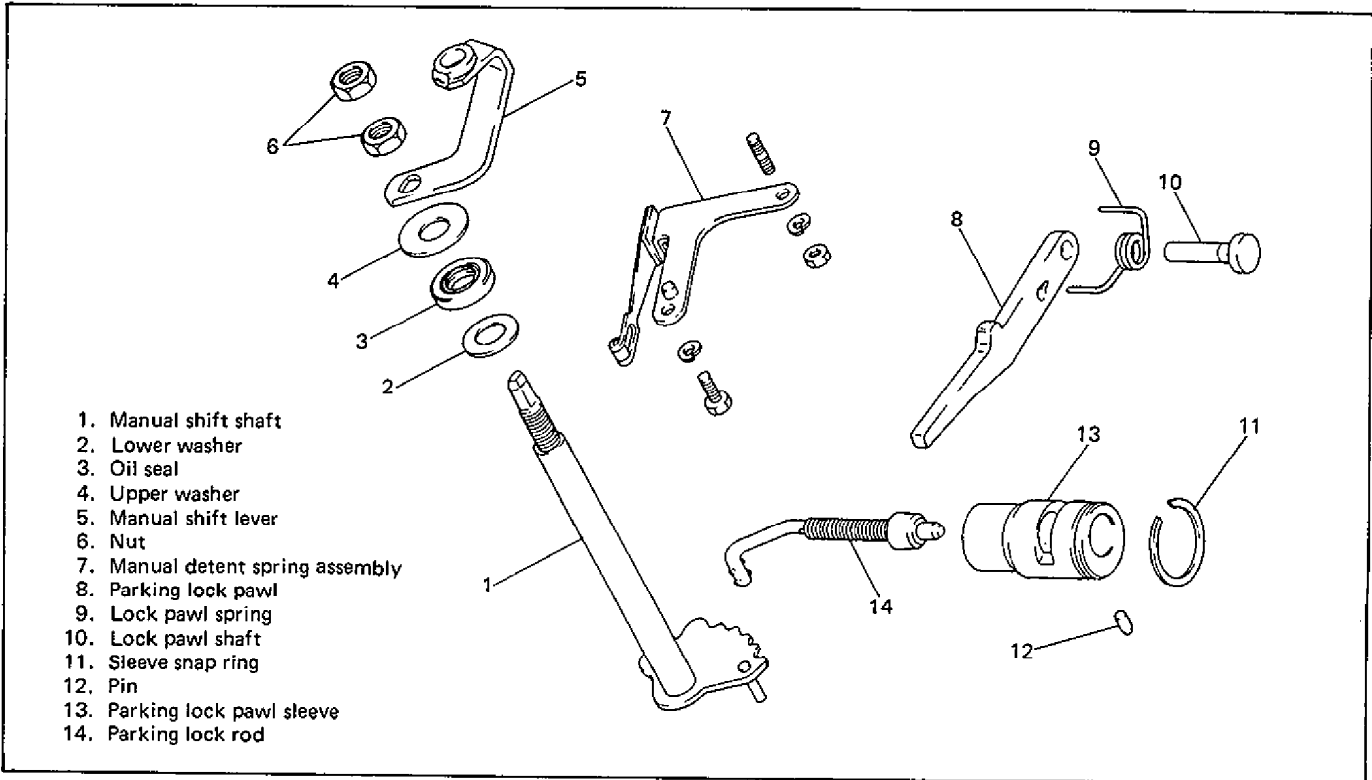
B-174 Manual Shift Shaft, Parking Lock Pawl and Related Parts
